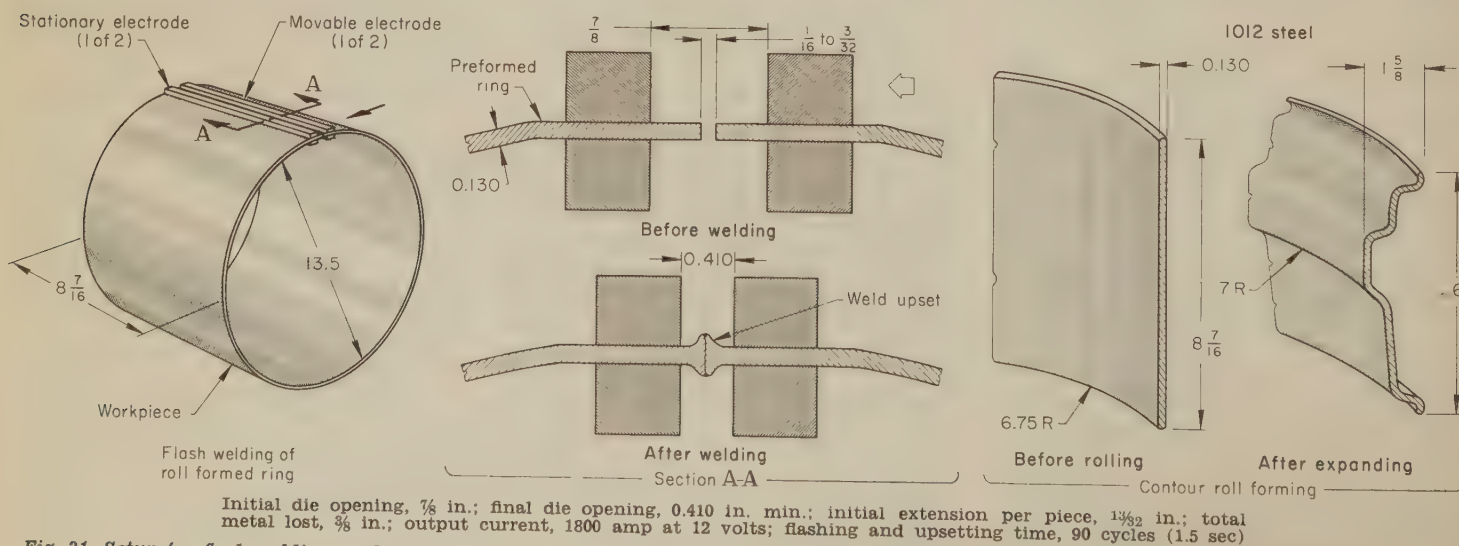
Setup for flash welding, and results of contour roll forming, a 1012 steel band in production of an automotive wheel rim (Example 445)
